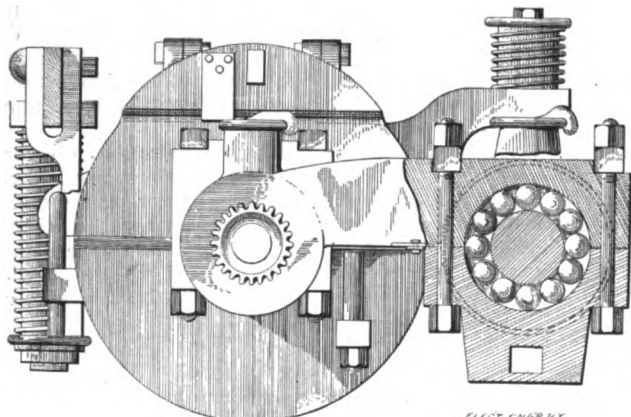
MOTOR WITH BALL-BEARING SUSPENSION.
